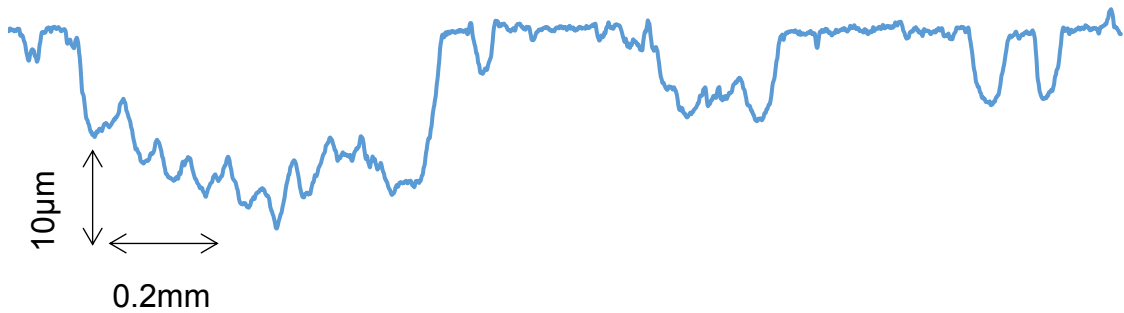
Machined surface profiles using ball end mill at different removal degree.
